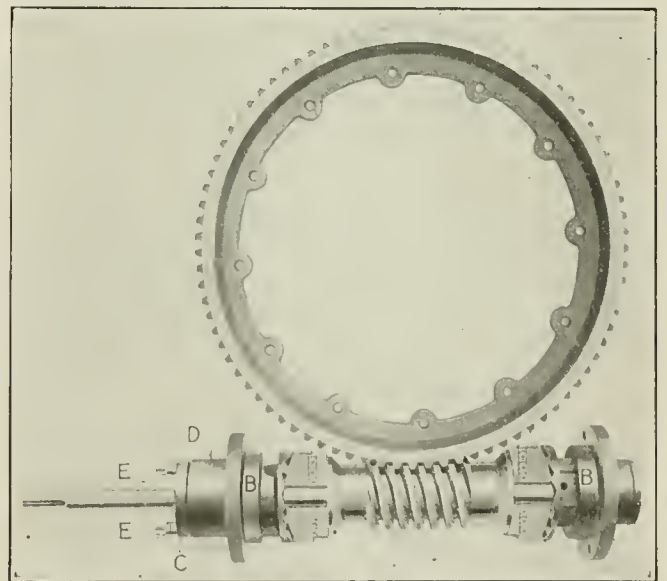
SINGLE WORM AND GEAR SHOWING BALL THRUST BEARING
